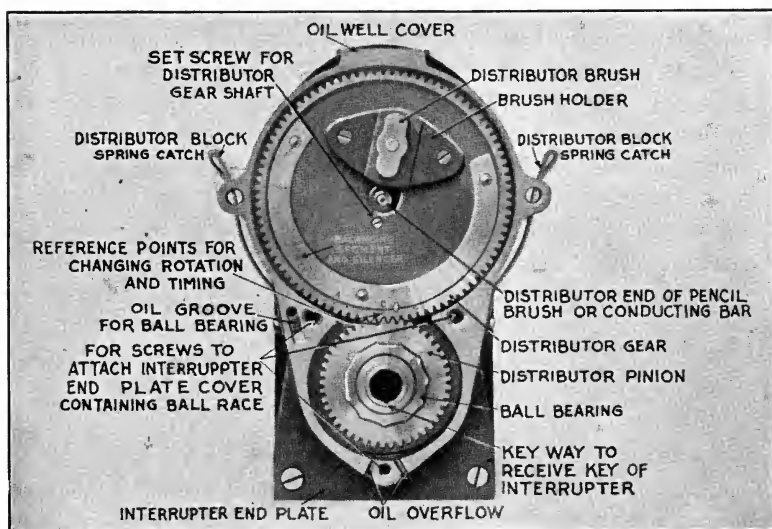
Bosch distributor gears showing markings for timing distributor with armature.
